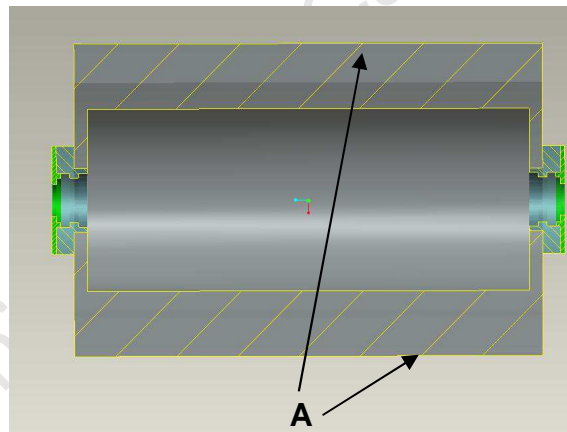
Cross-sectional view of mill chamber. A – sealing lips.
